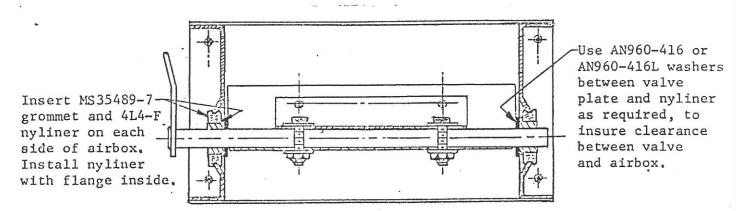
Section AA - Airbox with Valve and Bearings installed.
